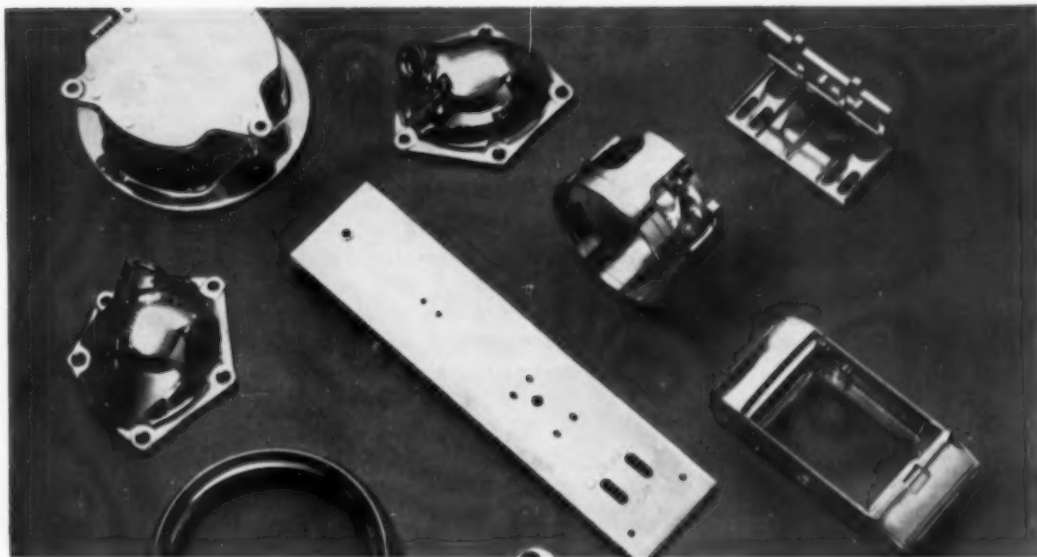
Typical Magnesium Die Castings With Decorative Chromium Plates
